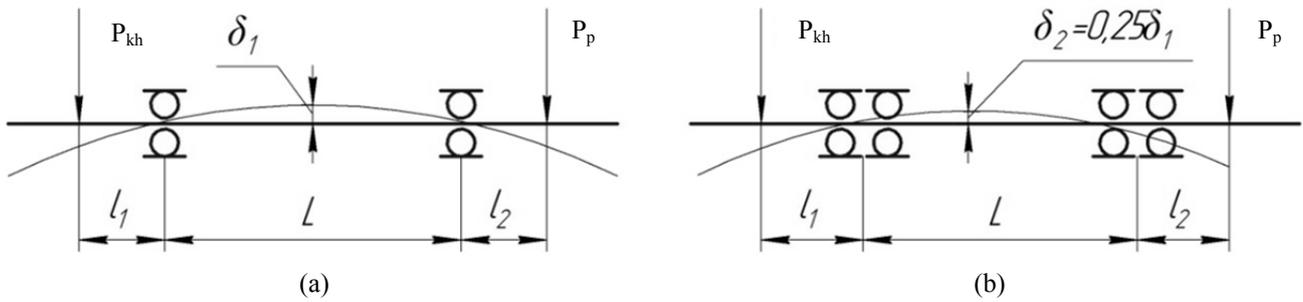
Installation diagram of the knife shaft in the bearing assemblies: (a) of foreign cutters; (b) of domestic L5-FKB/FKM cutters. P_{kh} is the weight of the knife head; P_p is the gravity of the pulley; L is the distance between the bearing assemblies; l_1, l_2 are the lengths of the consoles; δ_1, δ_2 are the maximum deflections of the cutter shaft.
